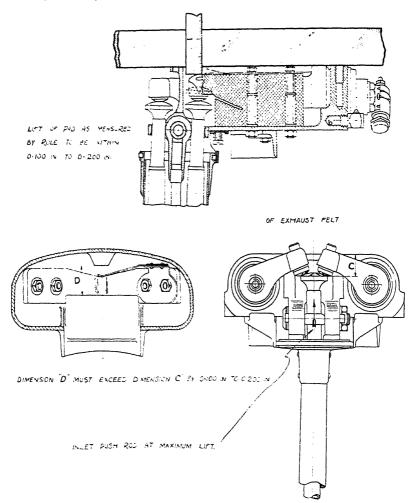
Diagram showing method of checking lift of rocker mechanism felt pads.
